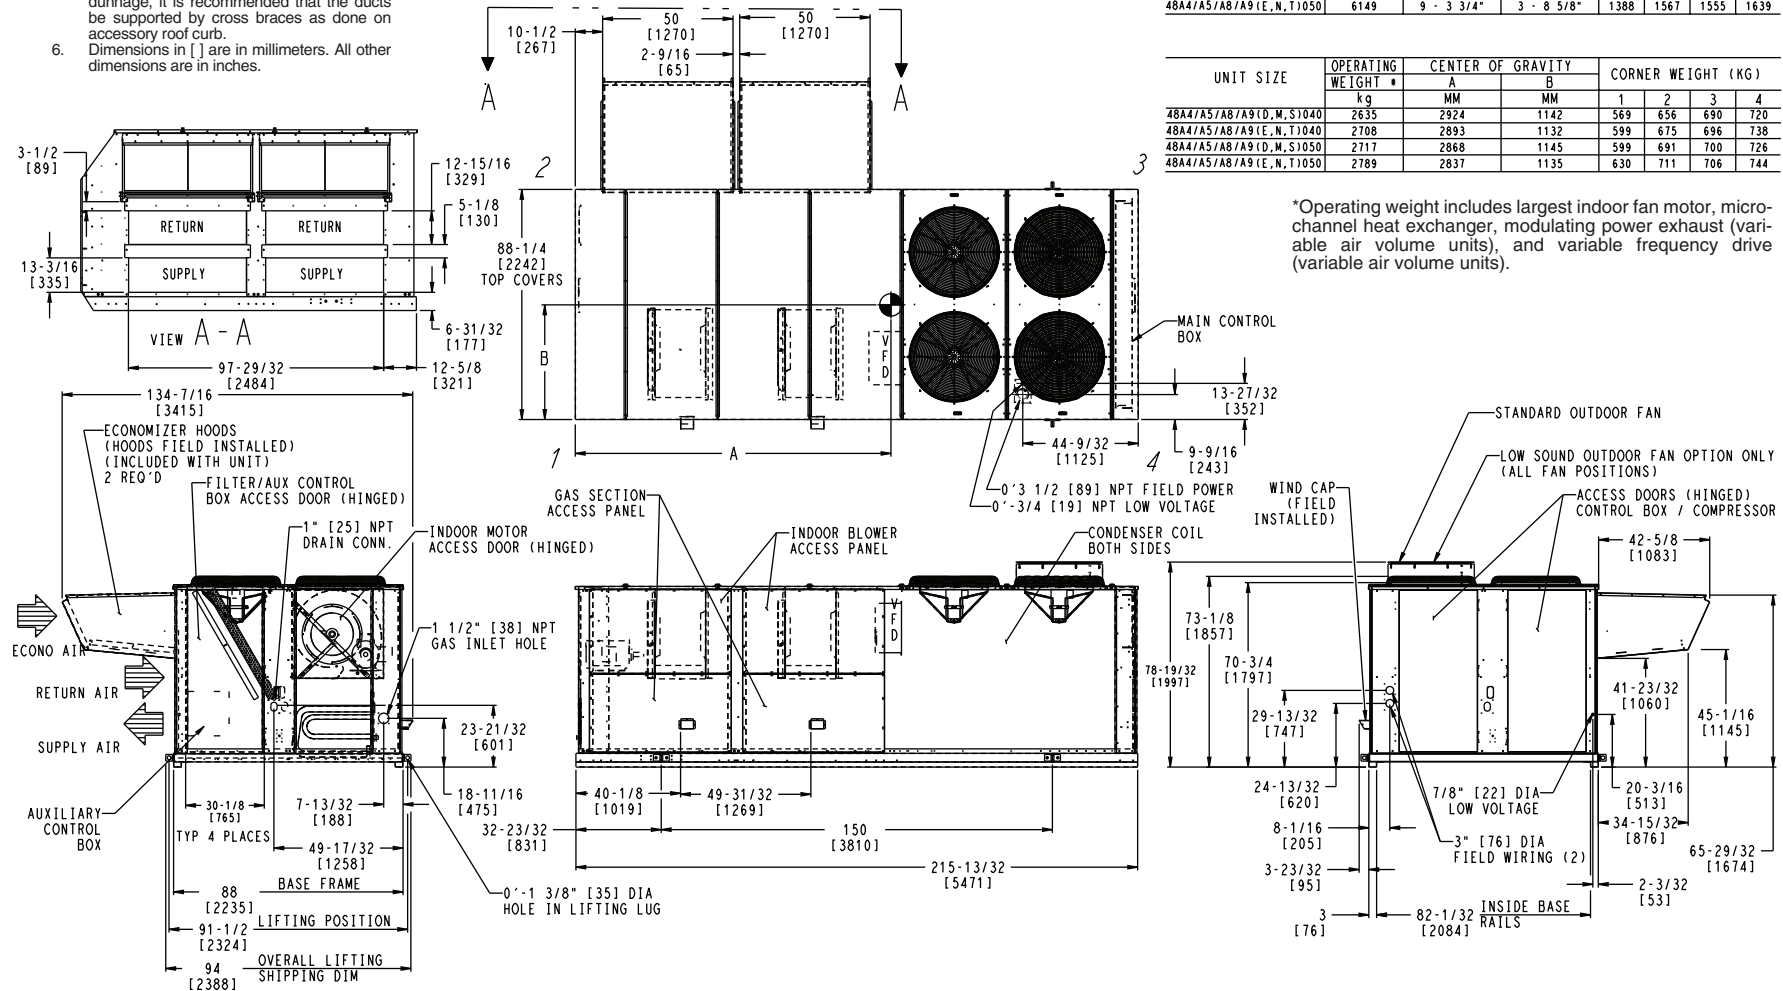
Base Unit Dimensions — 48A4,A5,A8,A9040-050
